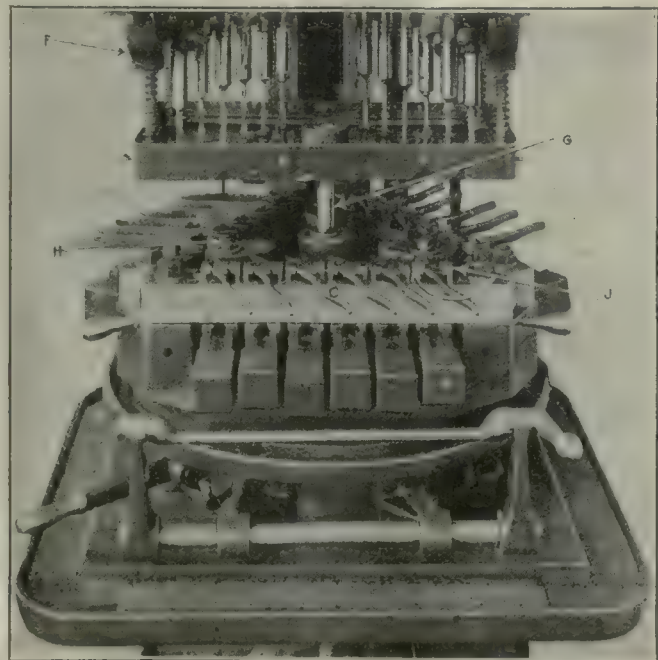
THE DRILLING MACHINE WITH FIXTURE AND WORK IN PLACE
